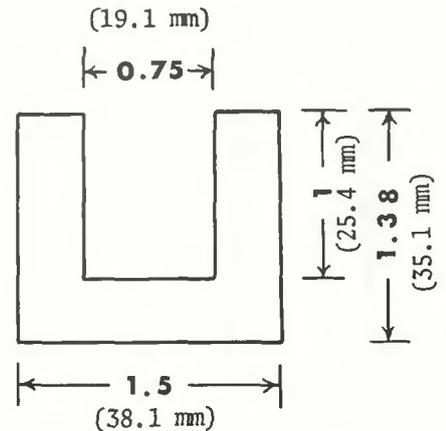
Configuration and dimensions of sheet steel shims used to maintain joint clearances
